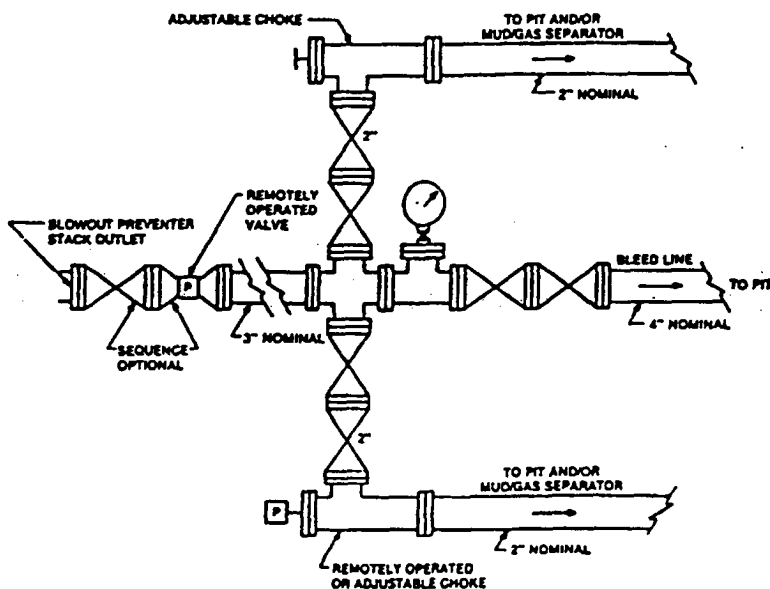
Typical choke manifold assembly for SM rated working pressure service — surface installation.
